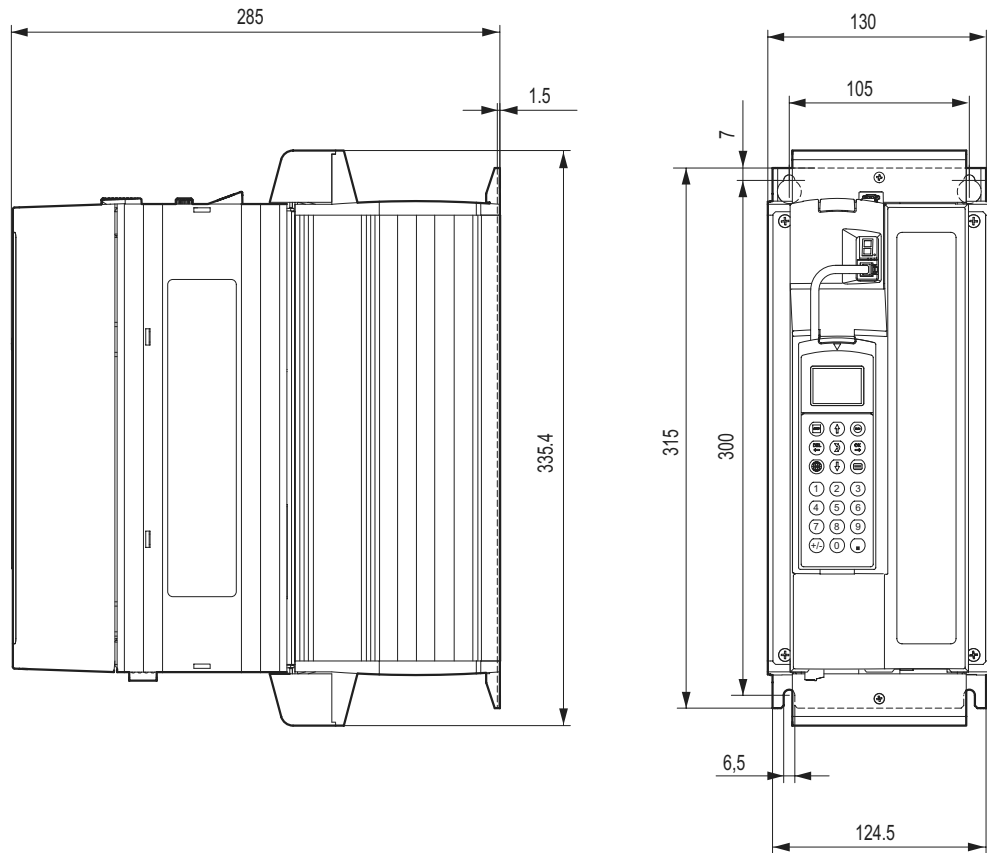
Dimension drawing for MDX61B size 2S, dimensions in mm
